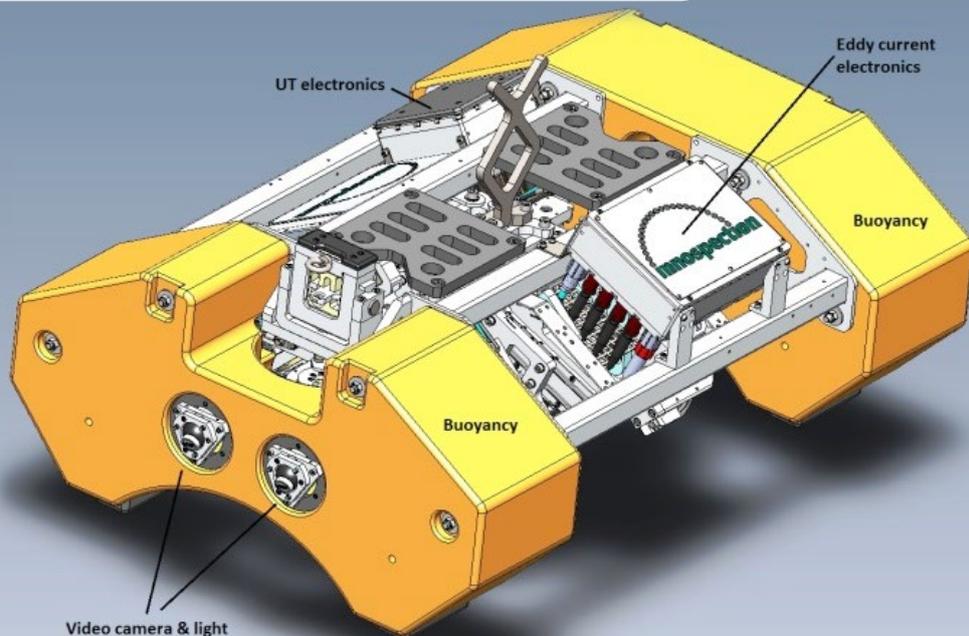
The MEC™-Combi Crawler tool for the inspection of subsea pipelines
